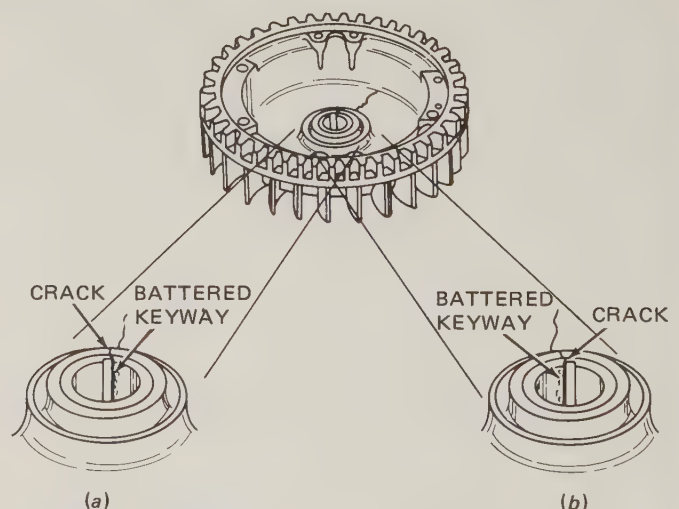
(a) Flywheel cracked by sudden stopping of the crankshaft, such as by a rotary-mower blade striking a large rock. (b) Flywheel cracked as the result of being loose on the crankshaft. (Tecumseh Products Company)
